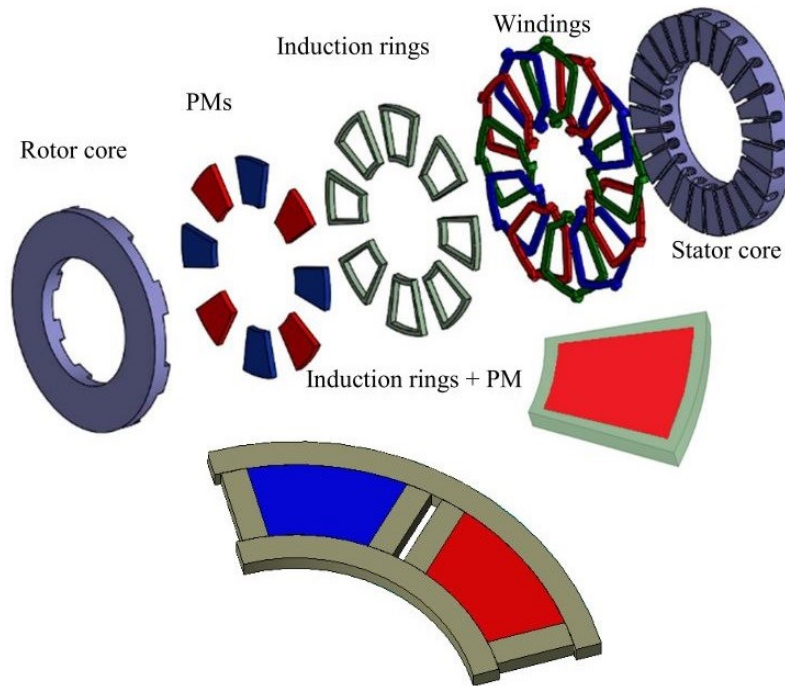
Exploded view of the line-start AFPM motor [67]
